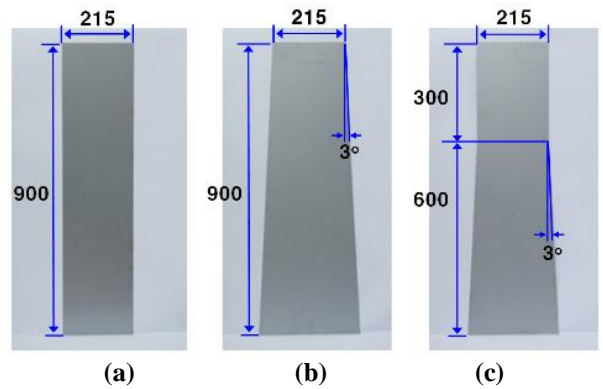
Dimension of initial blank; (a) shape A, (b) shape B, (c) shape C
